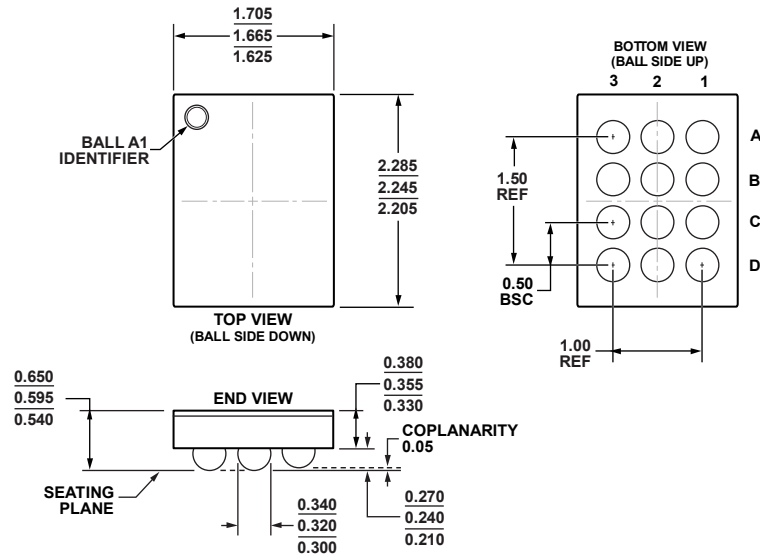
12-Ball Wafer Level Chip Scale Package [WLCSP] (CB-12-9)
